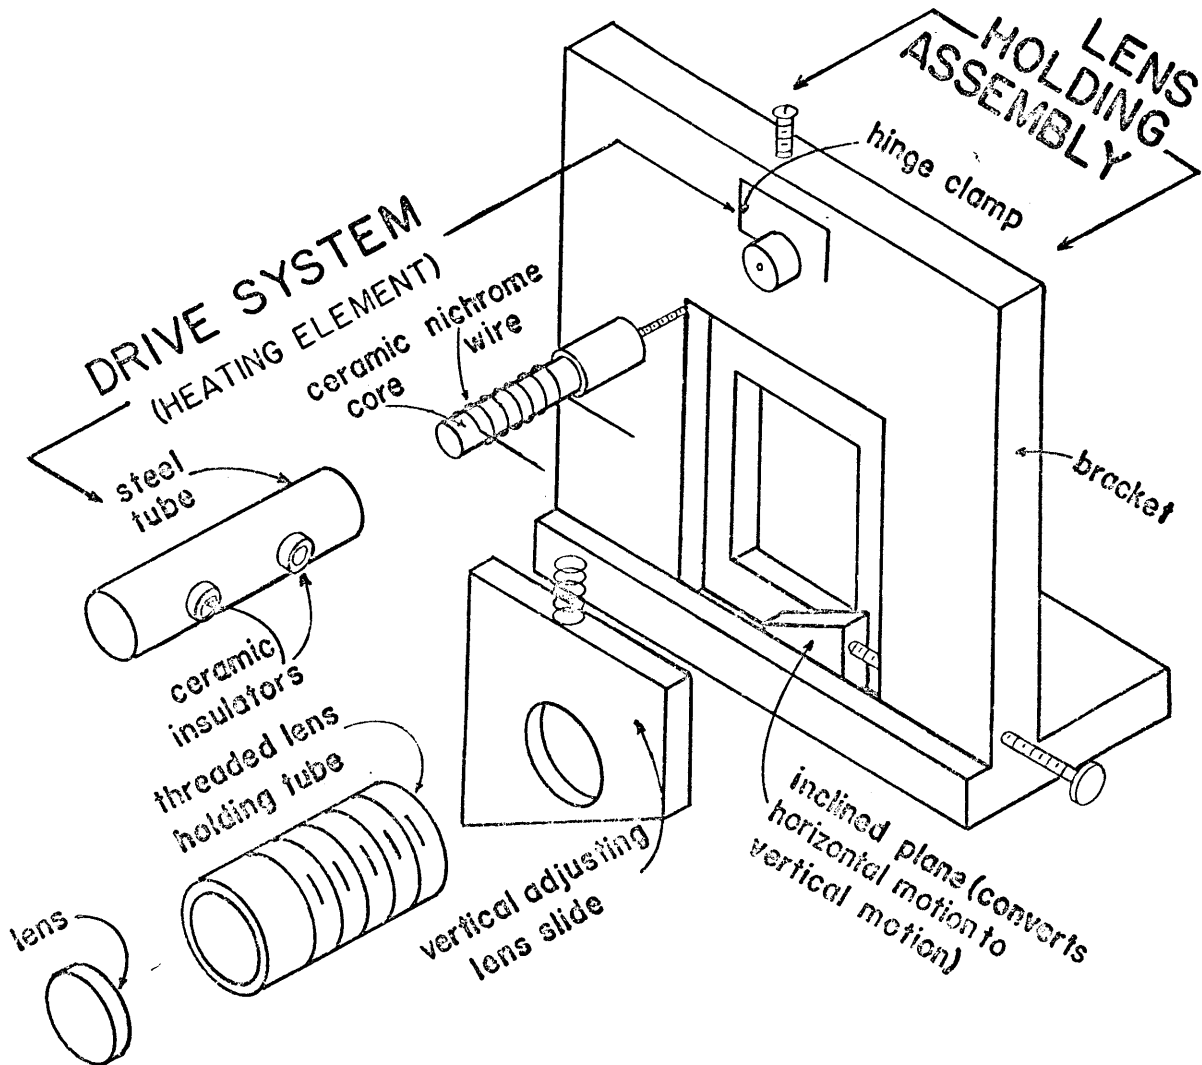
Exploded View of the Mounting for the Drive System and Lens #3.
